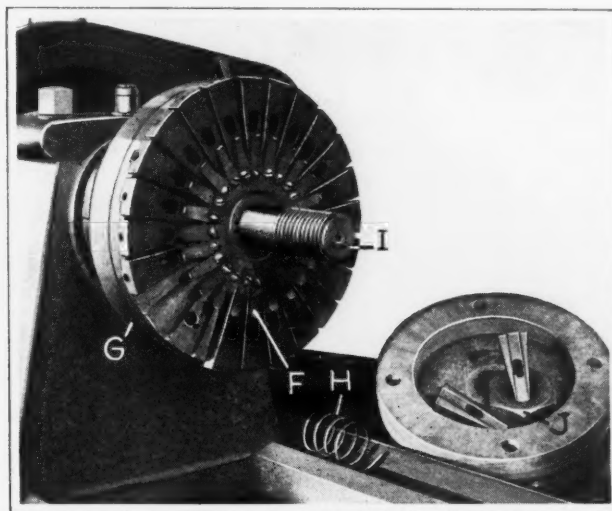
View of Partly Assembled Chuck Shown in Fig. 3
